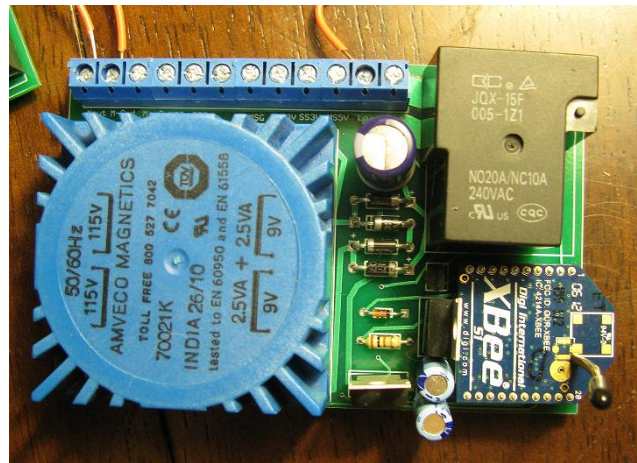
Top side of final completed PCB design with Xbee module attached.
